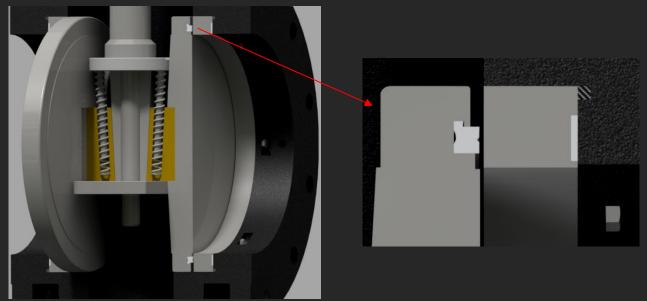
Valve in closed position, springs decompressed, discs located on disc shoulders and retracted from Valve seats.
